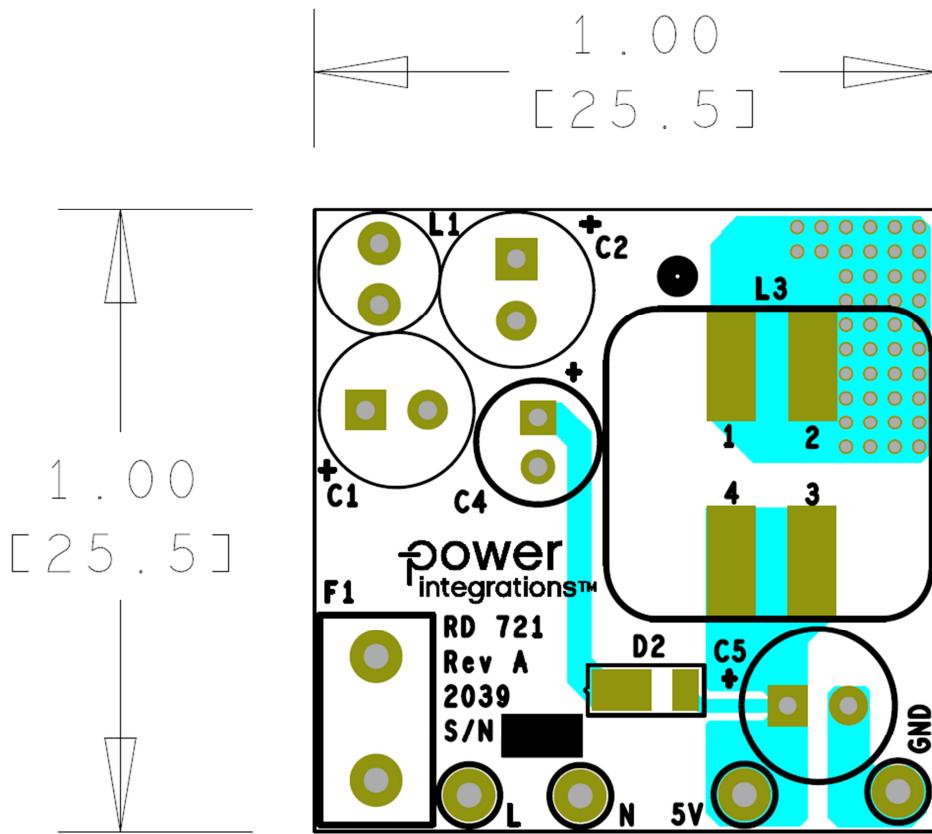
Printed Circuit Layout, Top (1.0" [25.5 mm] L x 1.0" [25.5 mm] W).
